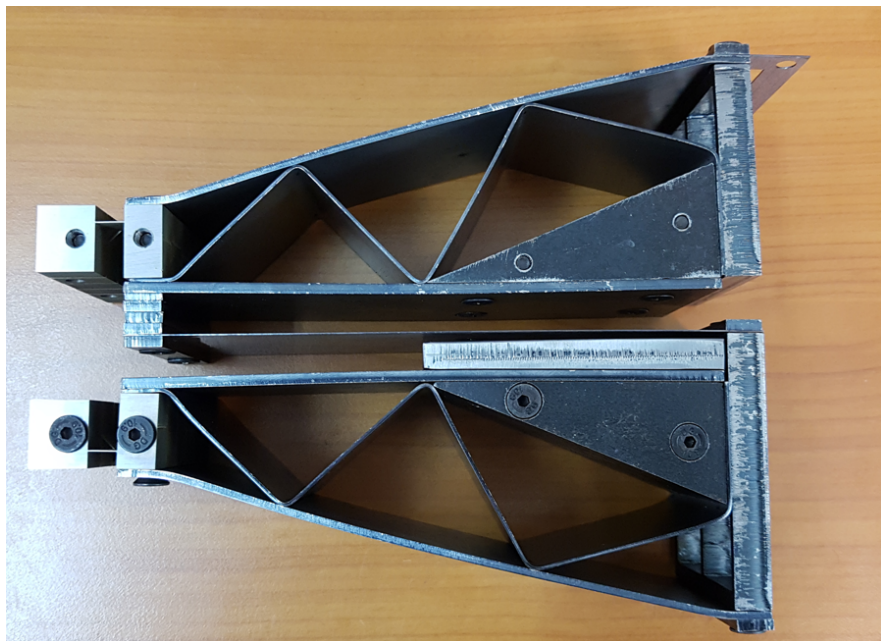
Connecting the long wall and short wall assemblies from the long flexure components.
